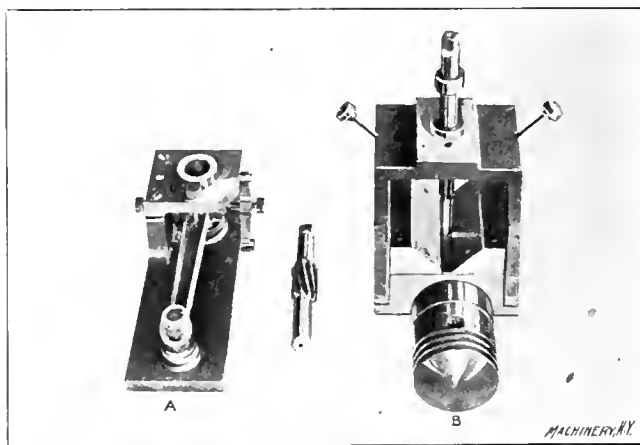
Reaming Jigs for the Crank End of the Connecting-rod, and the Wrist-pin Hole in the Piston
